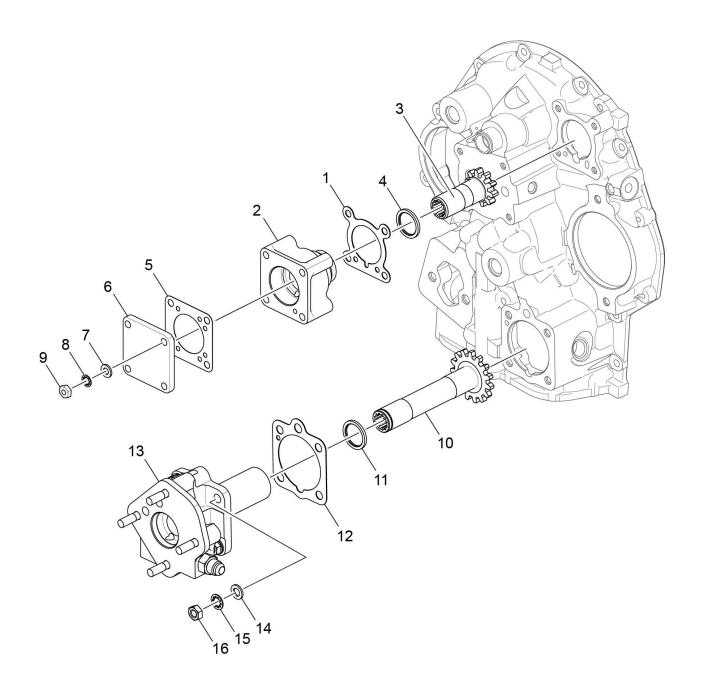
Vacuum Pump Drive and Cover and, Prop Governor Drive
